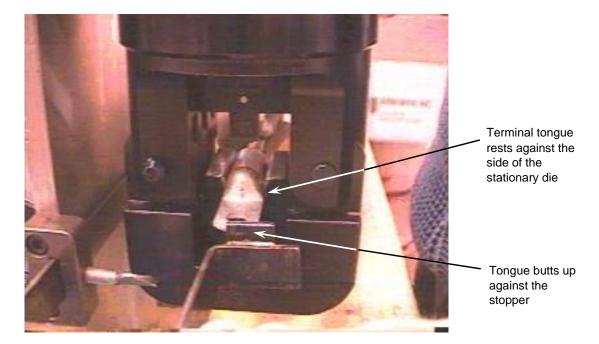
Positioning of Copalum Terminal Lug in Crimping Tool
